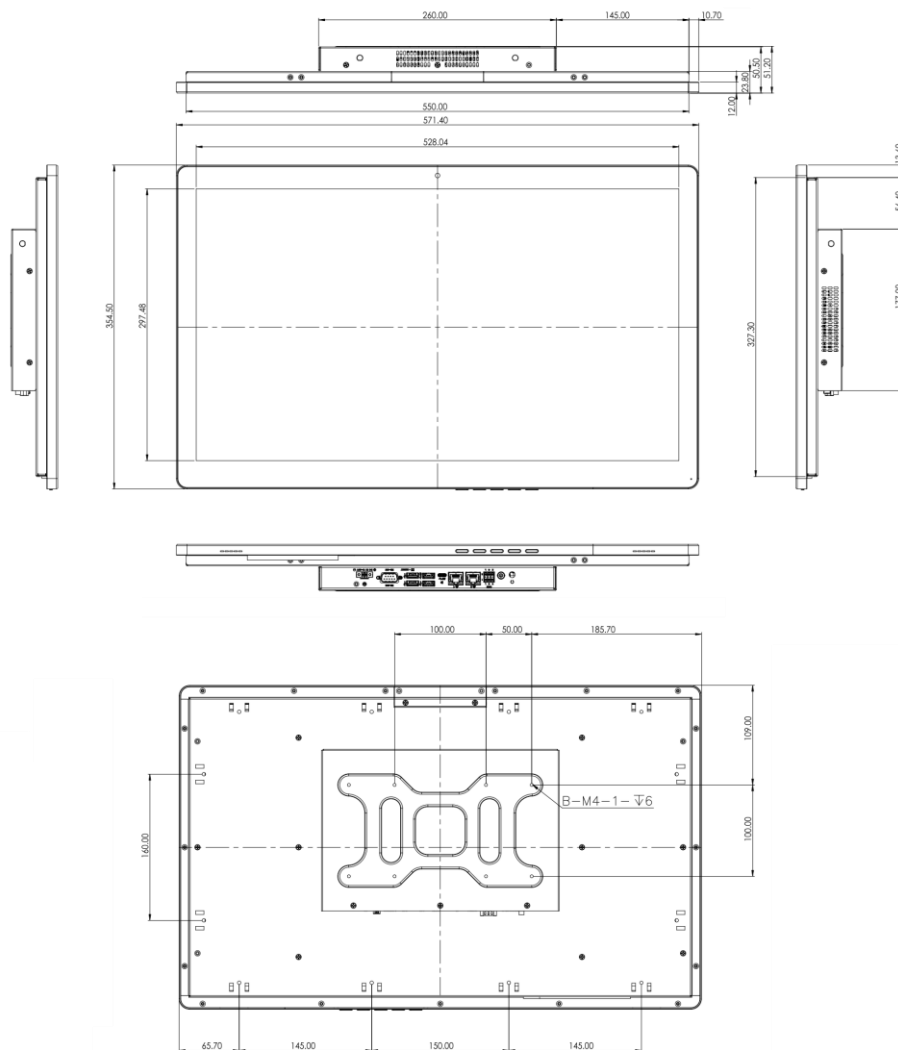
AURA-W238-RK3576 Dimensions (mm)
